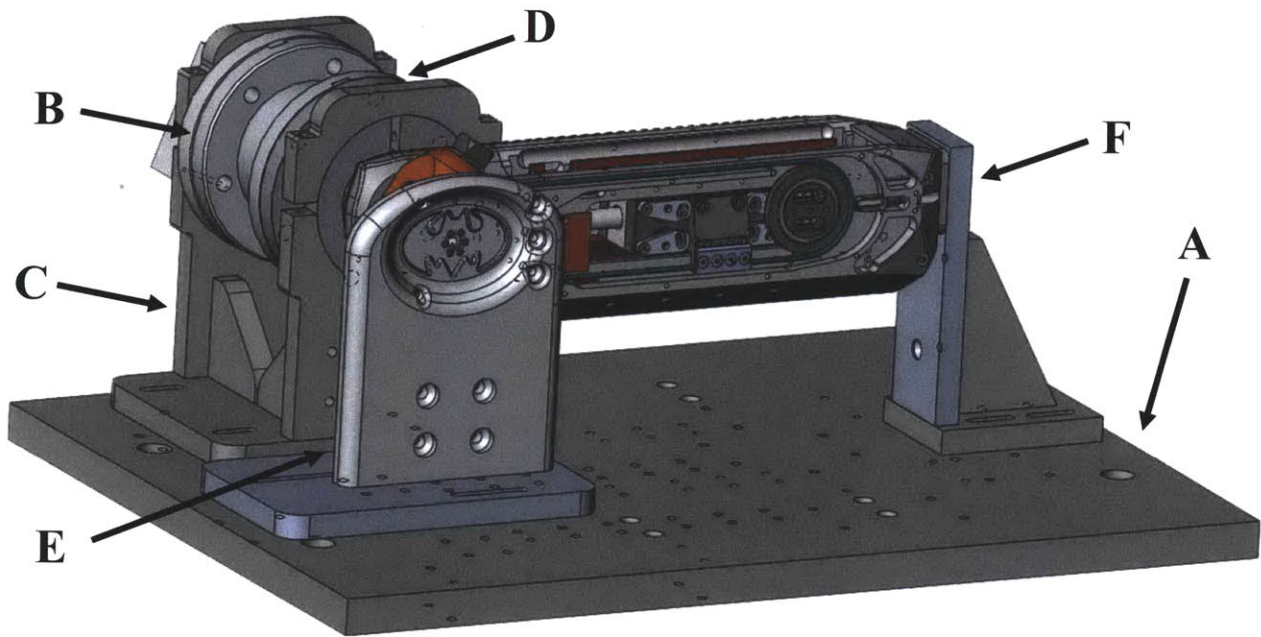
Solid model of the test bench assembly with Revision_1 active knee prosthesis. The main test bench components are highlighted: the support base (A), the torque sensor (B), the torque sensor mount (C), the torque sensor adapter (D), the joint lateral mount (E), and the distal mount (F).
